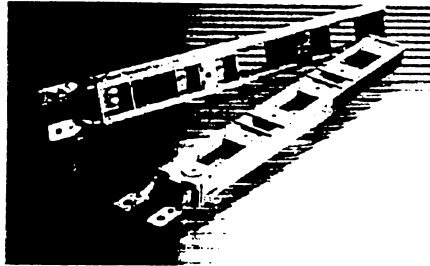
Base module of disconnection switchgear made by Pfisterer, Stuttgart [22] with embedded copper conductors, produced by injection moulding
